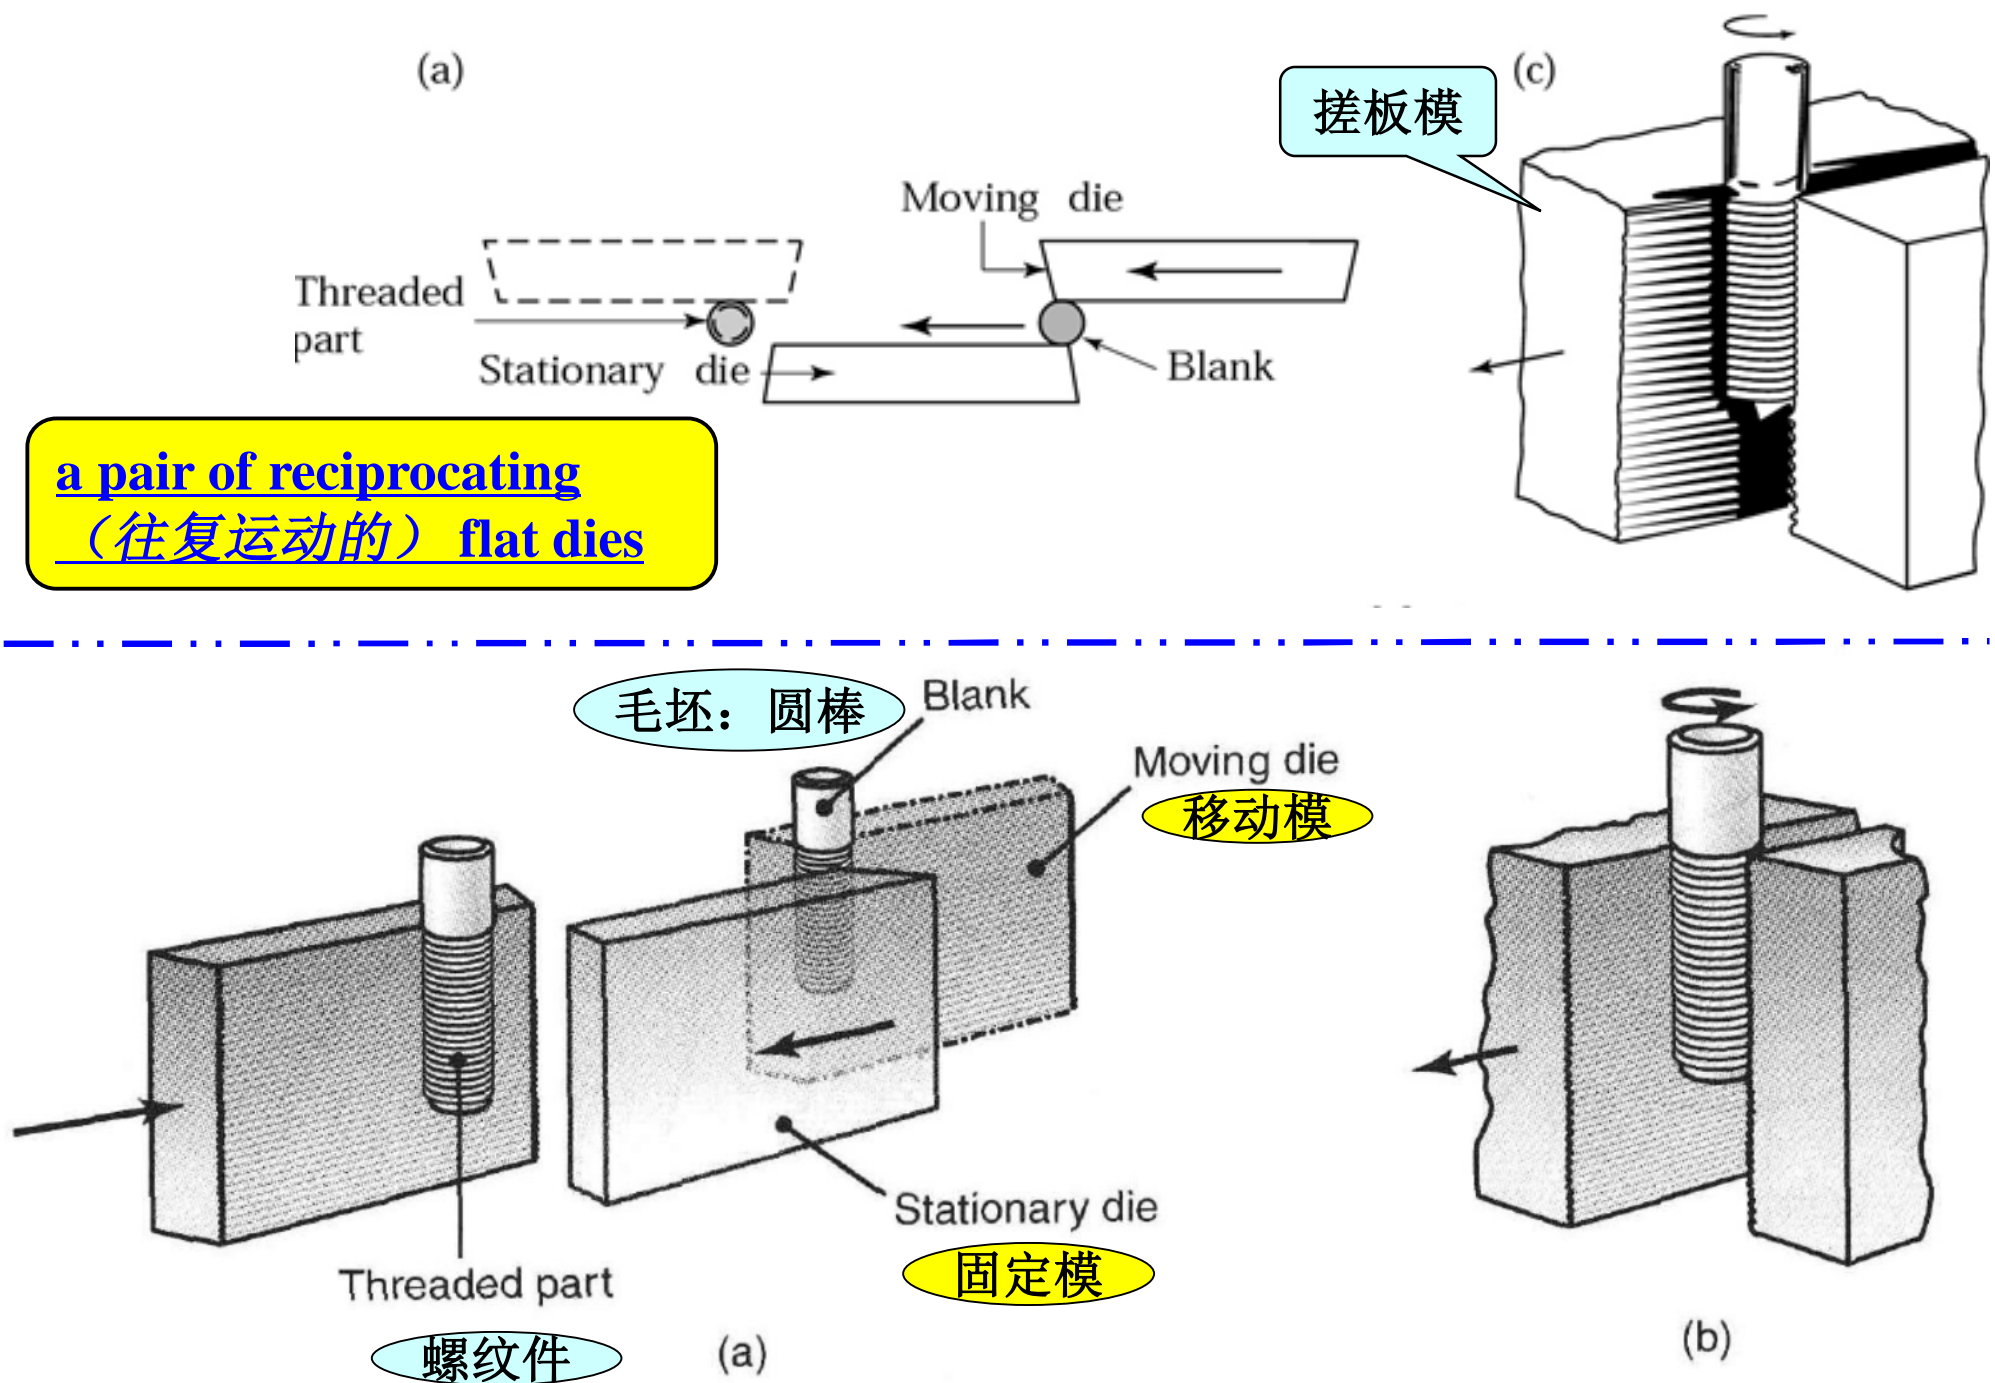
Thread-rolling processes: (a) and (b) reciprocating flat dies
